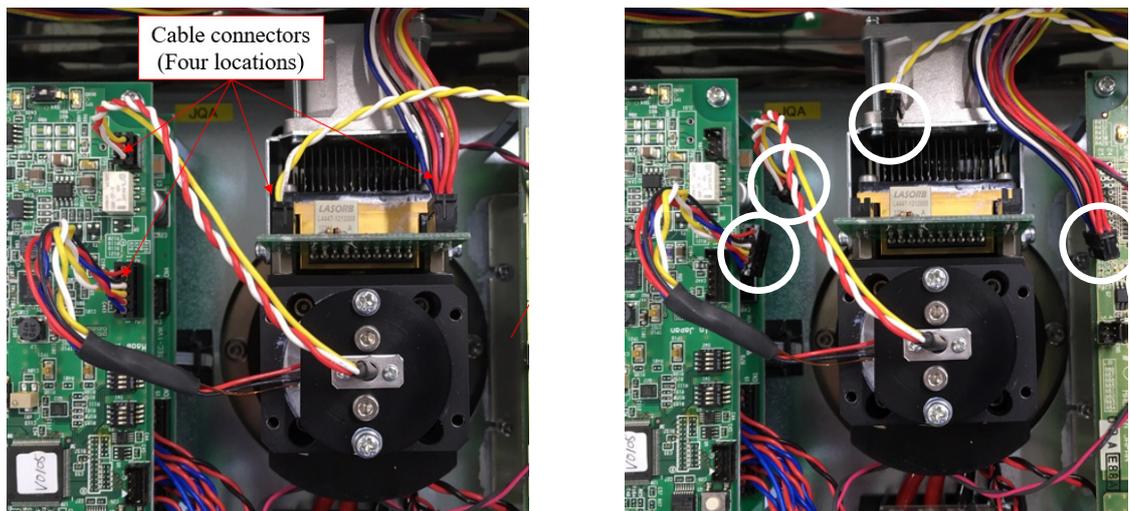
Before disconnecting (left) and after disconnecting (right) the cable connectors (four places)
